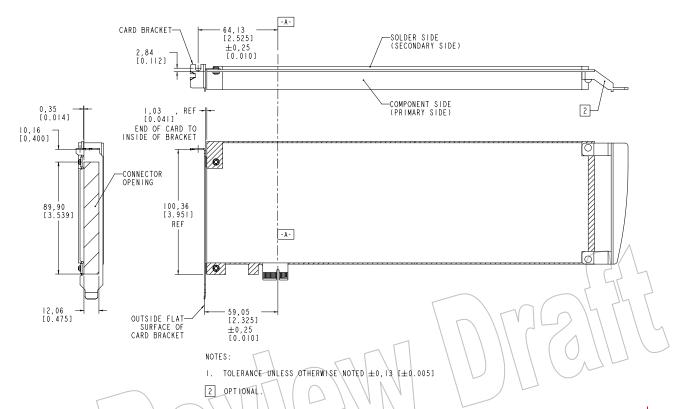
Standard Height PCI Express Add-in Card with the I/O Bracket and Card Retainer
